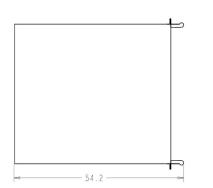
Dimensions of Laser Head for FLCPA-01C (cm)
